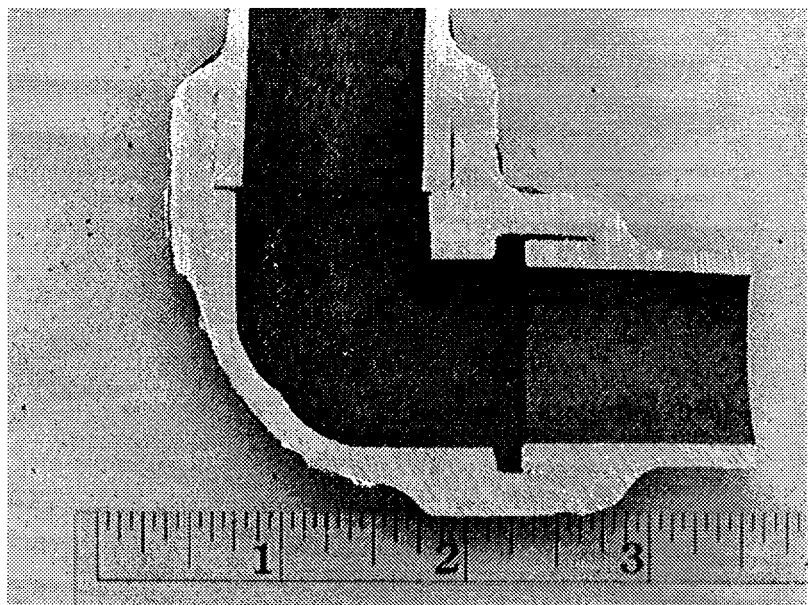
Photograph showing ID surface of components. Note lack of pull-back in vertically oriented weld. Leaking weld is oriented horizontally and exhibits adequate pull-back. Internal surfaces do not exhibit any evidence of excessive wastage.
